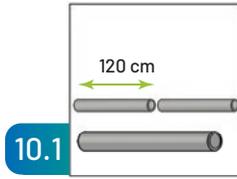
Step 4 – Assembly of parts (© GIZ Fit for School)
